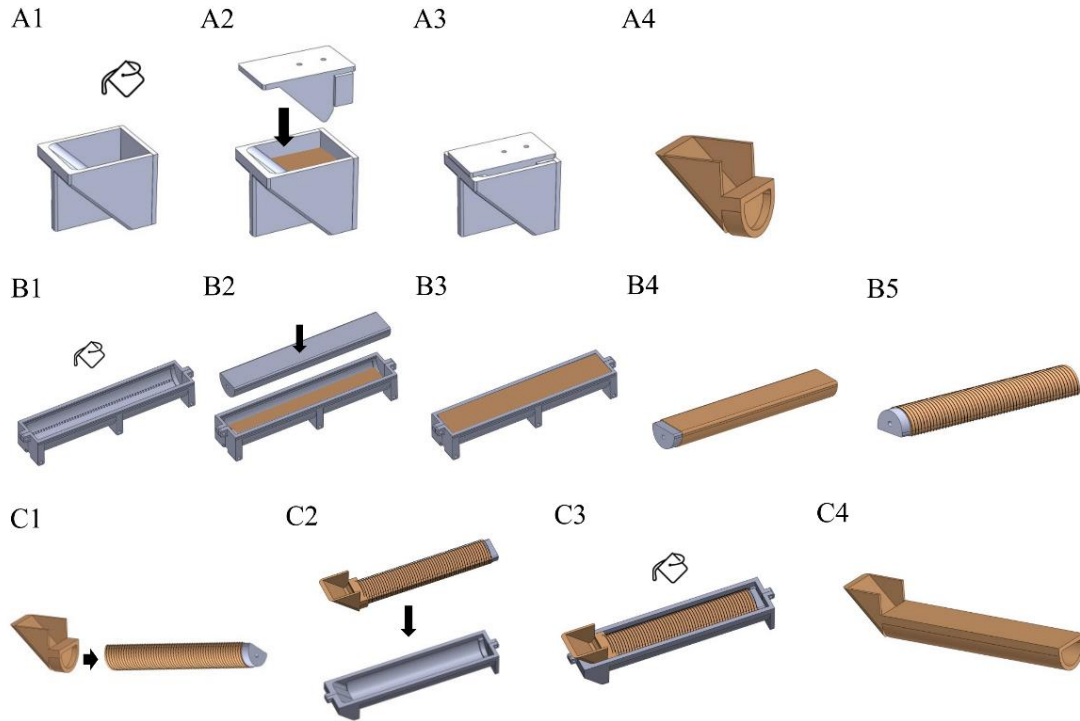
Pneumatic actuator fabrication process. The assembly is fabricated using three molding steps, and molds are shown in gray. (A) Mold A, the pneumatic actuator fingertip fabrication process, (A1-A4). (B) Mold B, the inner layer of the pneumatic actuator for winding reinforced fibers. (C) Mold C, finished pneumatic actuator fabrication.
